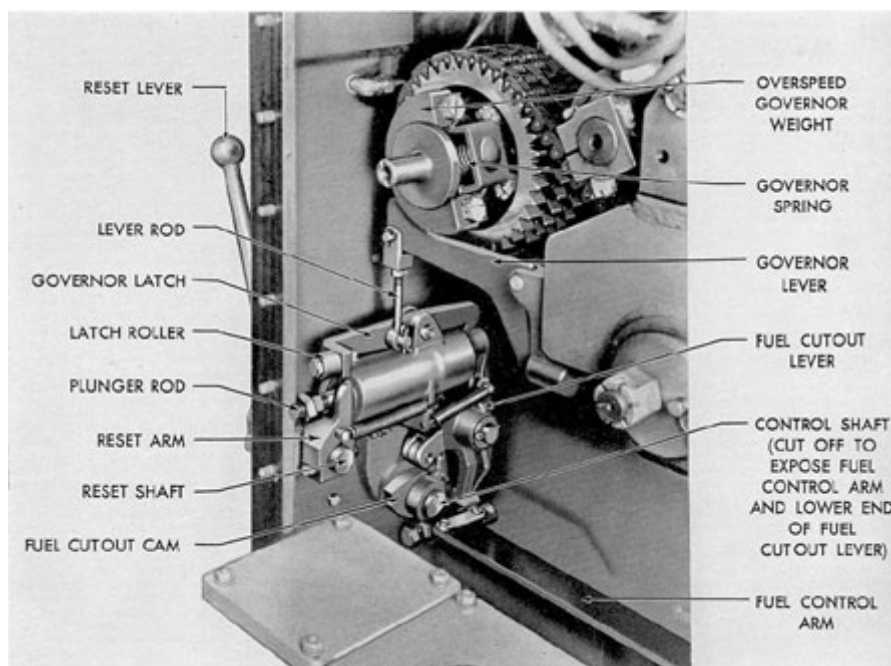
F-M overspeed governor and emergency stop mechanism.
